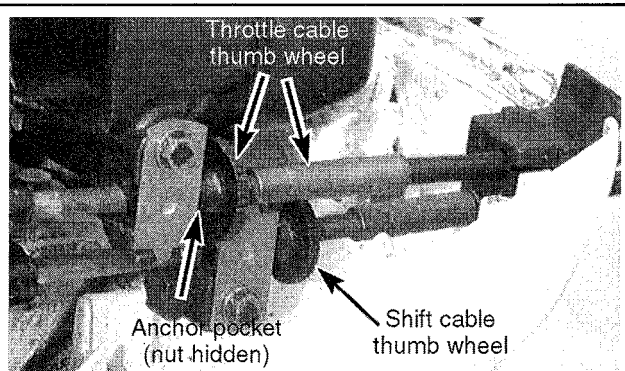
The shift and throttle cables are adjusted using thumb wheels
